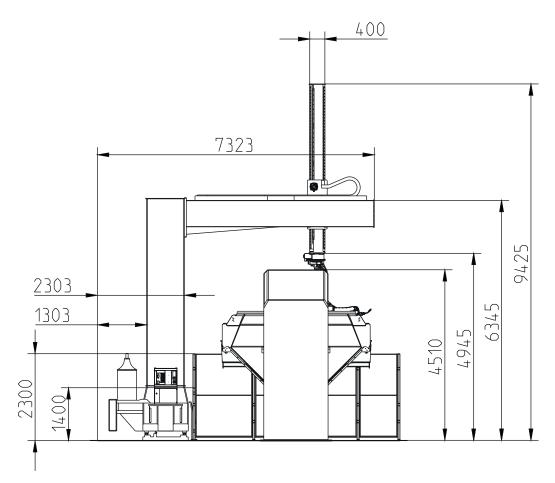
Side view dimensional drawing, all dimensions in millimetres.
